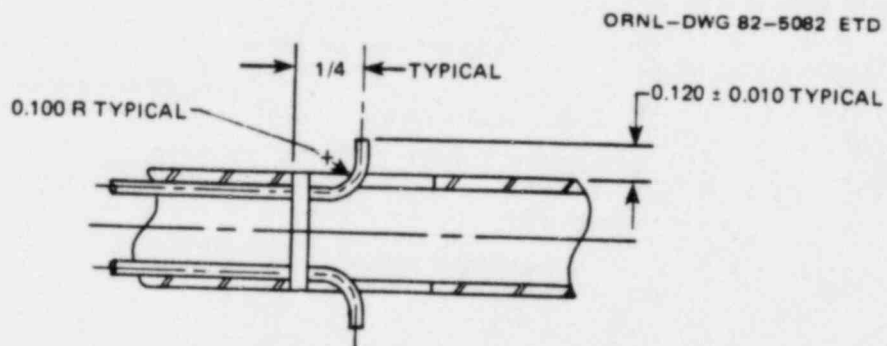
Cross section of thermocouple array rod illustrating protrusion of thermocouples from the rod. Dimensions are in inches (1 in. = 2.54 cm).
